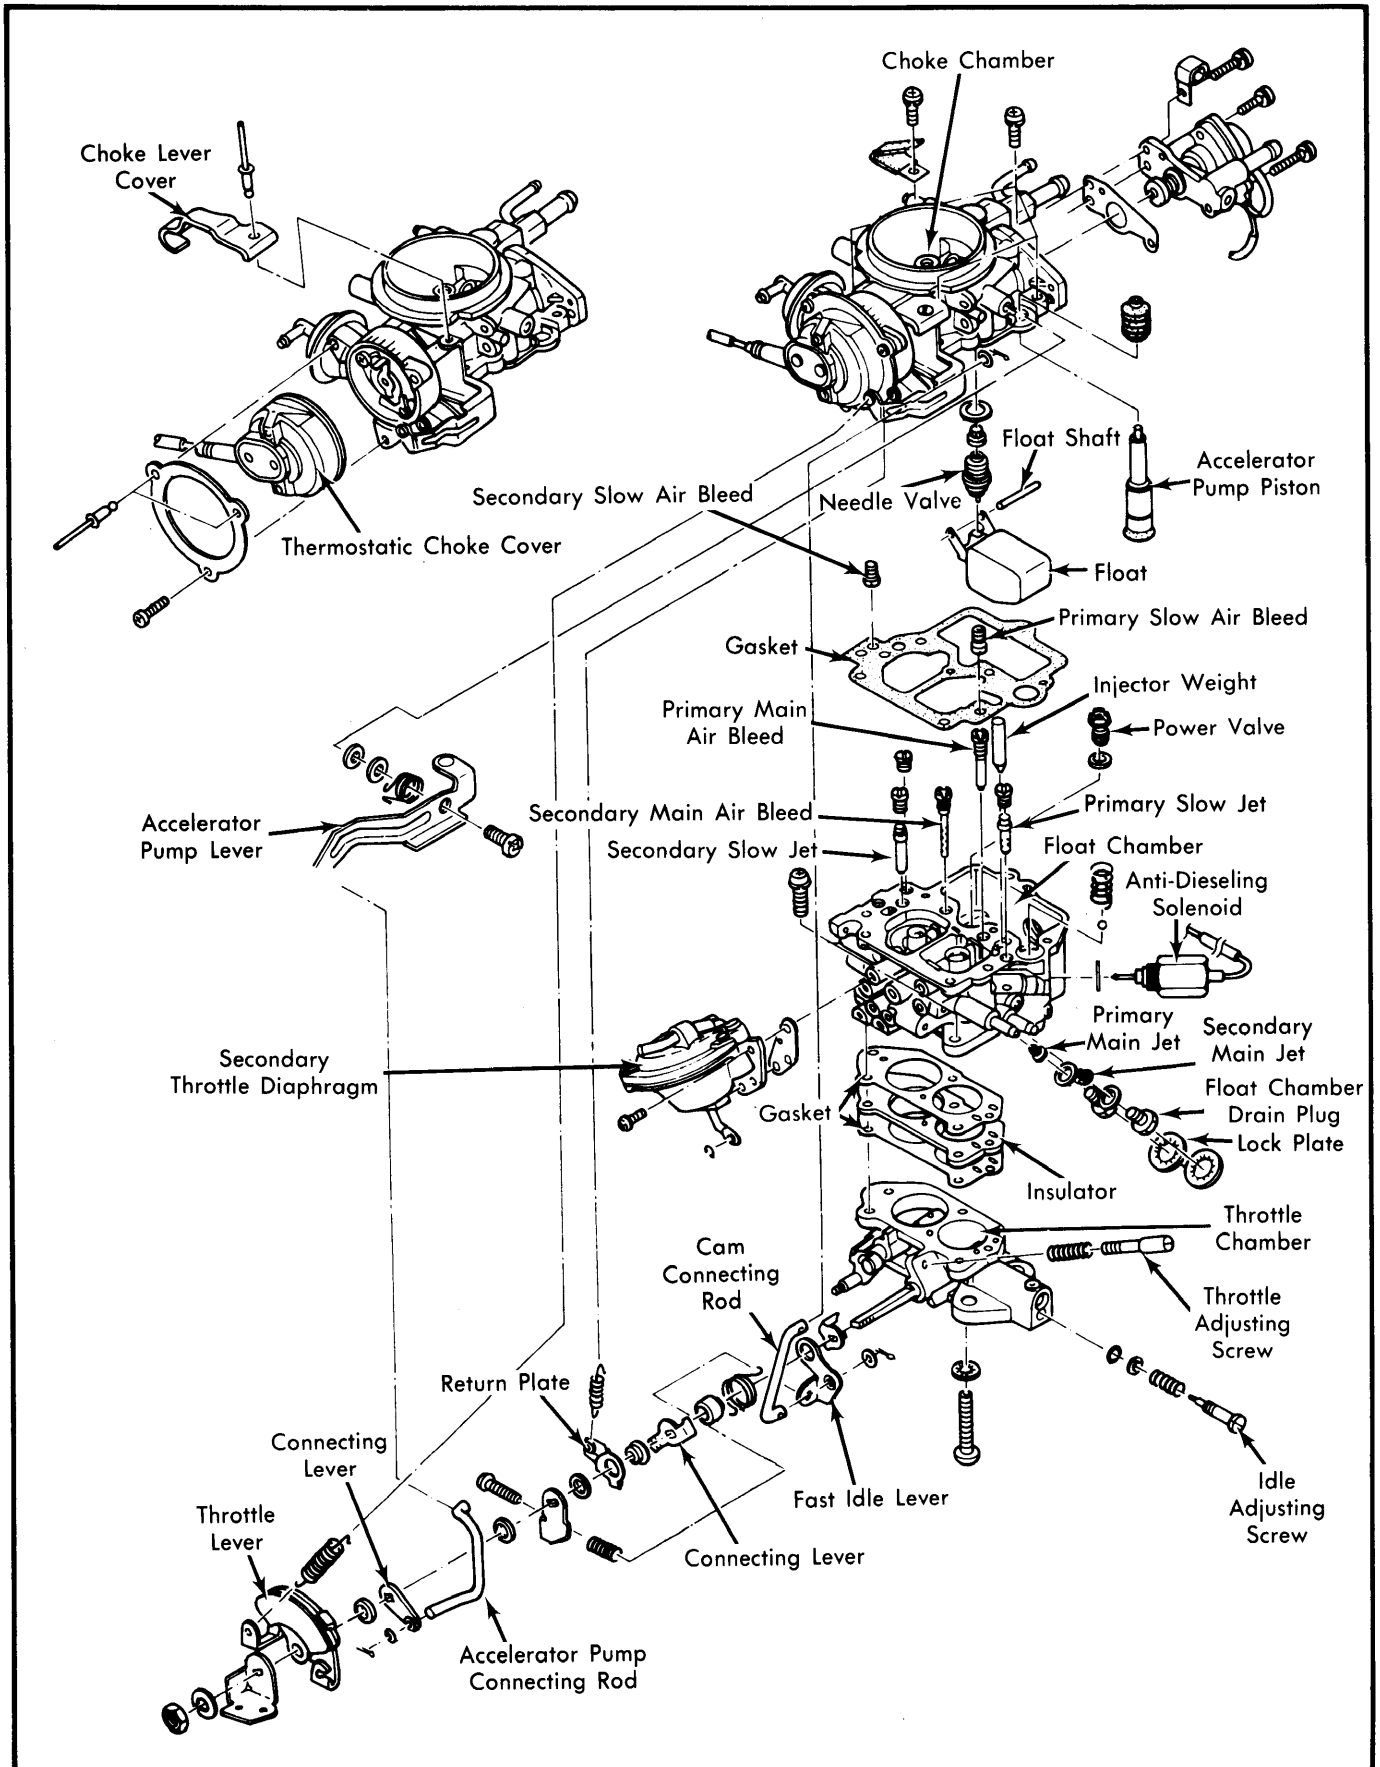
Exploded View of Subaru Hitachi DCP 306 Carburetor
